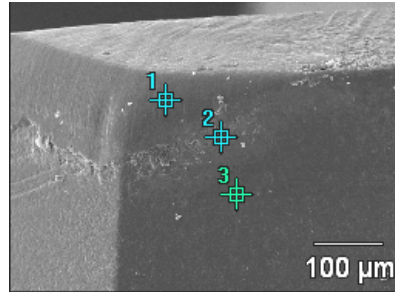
Ceramic tool cutting edge in the end of tool life - Workpiece 2 - (x200) - MEV (20 kV)
